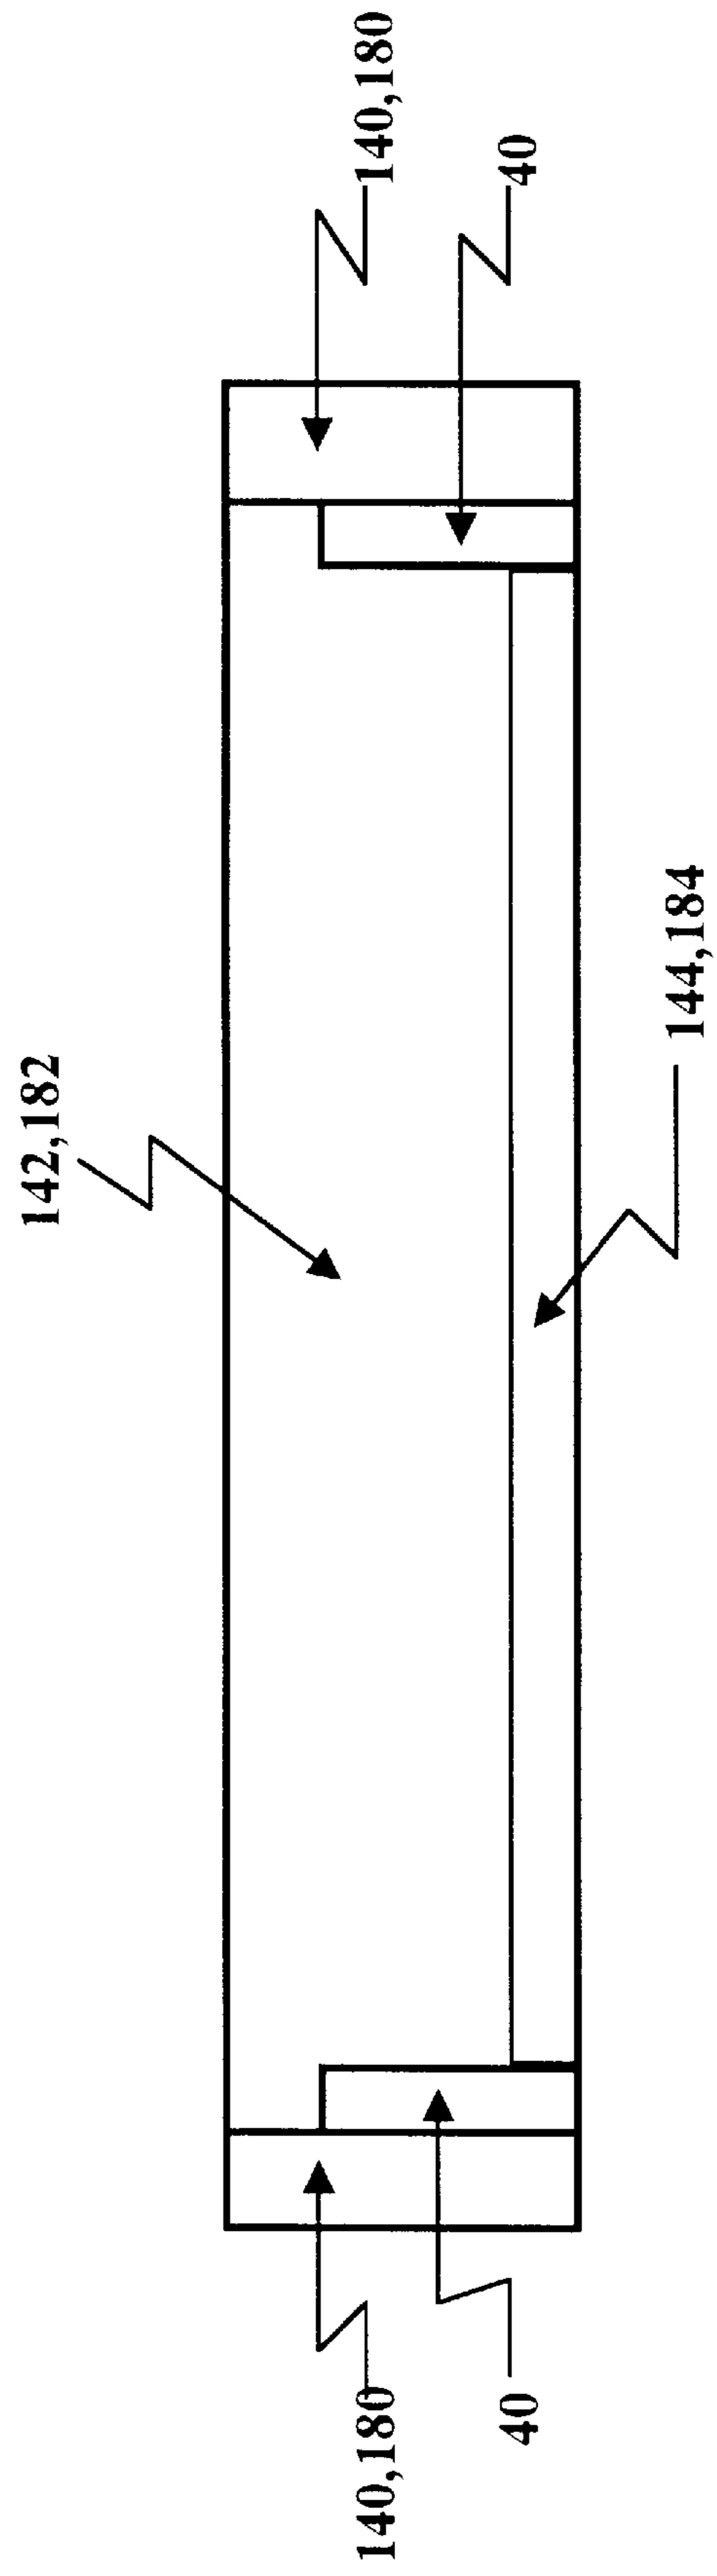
A - BOTTOM VIEW OF AN INTERIOR SIDE
